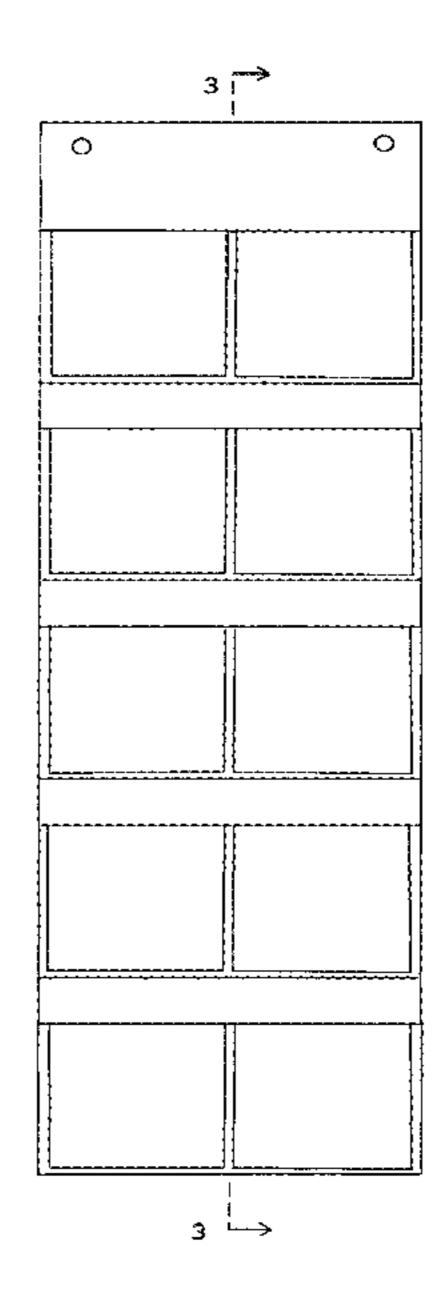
is a back side view of the pocket-in-pocket operating room counting container shown in FIG. 1 as my new design. FIG. 3 is cross sectional view taken along line 3-3 of FIG.
